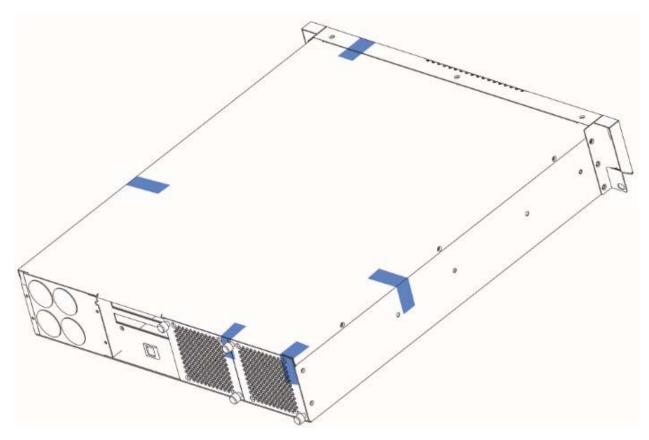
GX6116 Series Tamper Evidence Label Placement (Front, Rear, and Sides)
